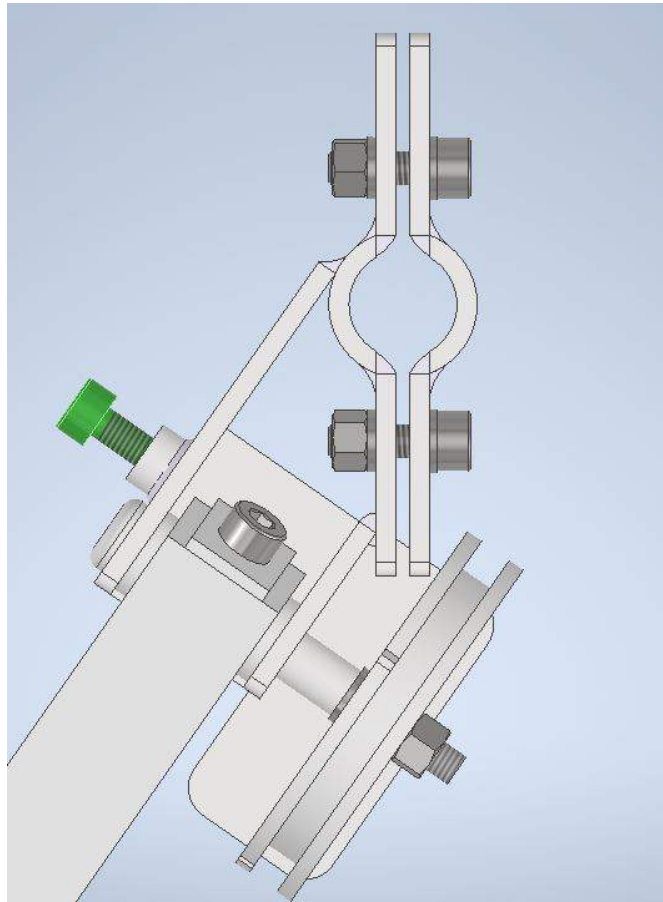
Zoomed-in right-side view of left-side mechanism that supports bicycle
